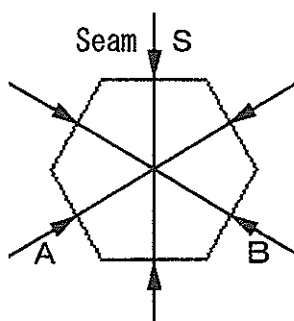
Cross section and welding position of wrapper tube
